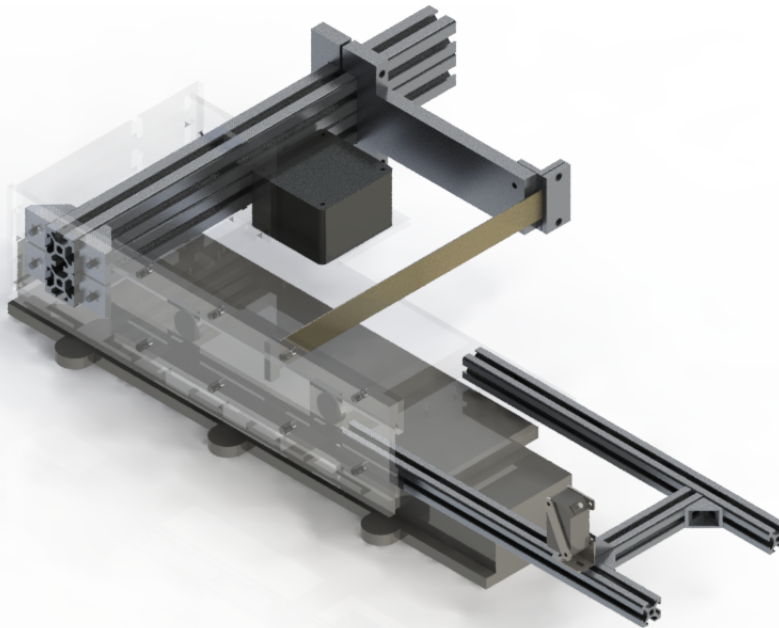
Final prototype design, in Appendix A you can find the CAD designs of the parts used to build the prototype.
